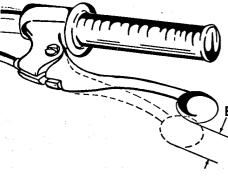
Cable should be adjusted to provide 1/2 in. free play at B.
